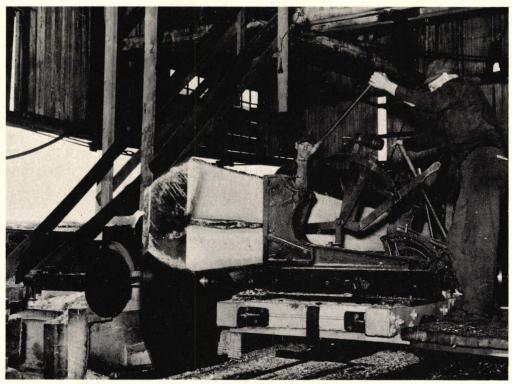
The standard type of circular sawmill is a general-purpose mill used for cutting beech logs.
